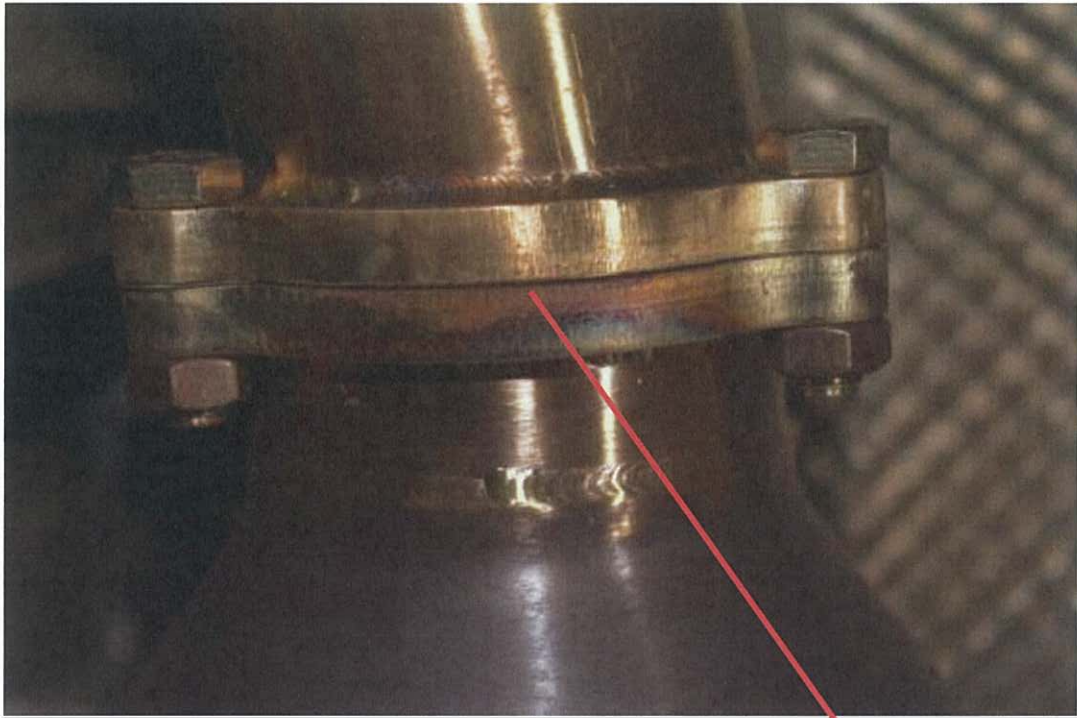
PV Right Exhaust Muffler to Catalytic Converter Joint with gaps
